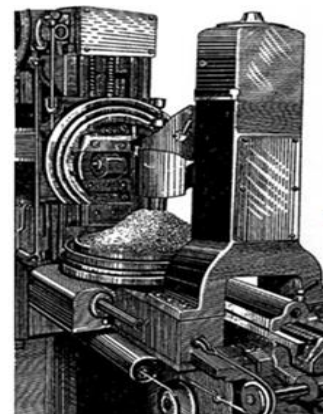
Modified milling machine, for non-circular gear processing (1951) [8]
